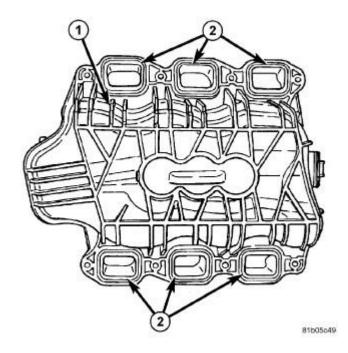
INTAKE MANIFOLD SEALS Courtesy of CHRYSLER LLC
